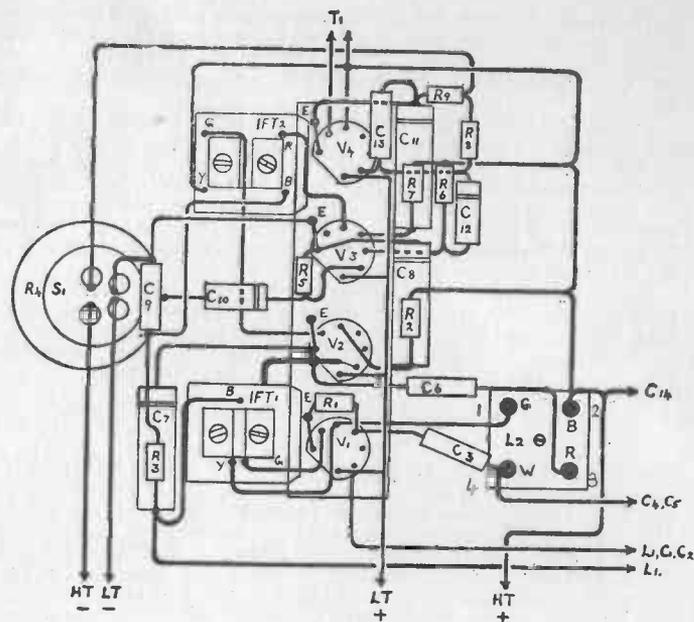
Point-to-Point Wiring Plan of the "Simplest Super"
